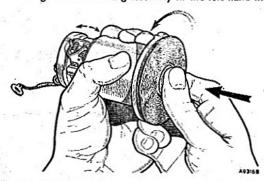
Setting the diaphragm. Unscrew until the rocker just 'throws over'
